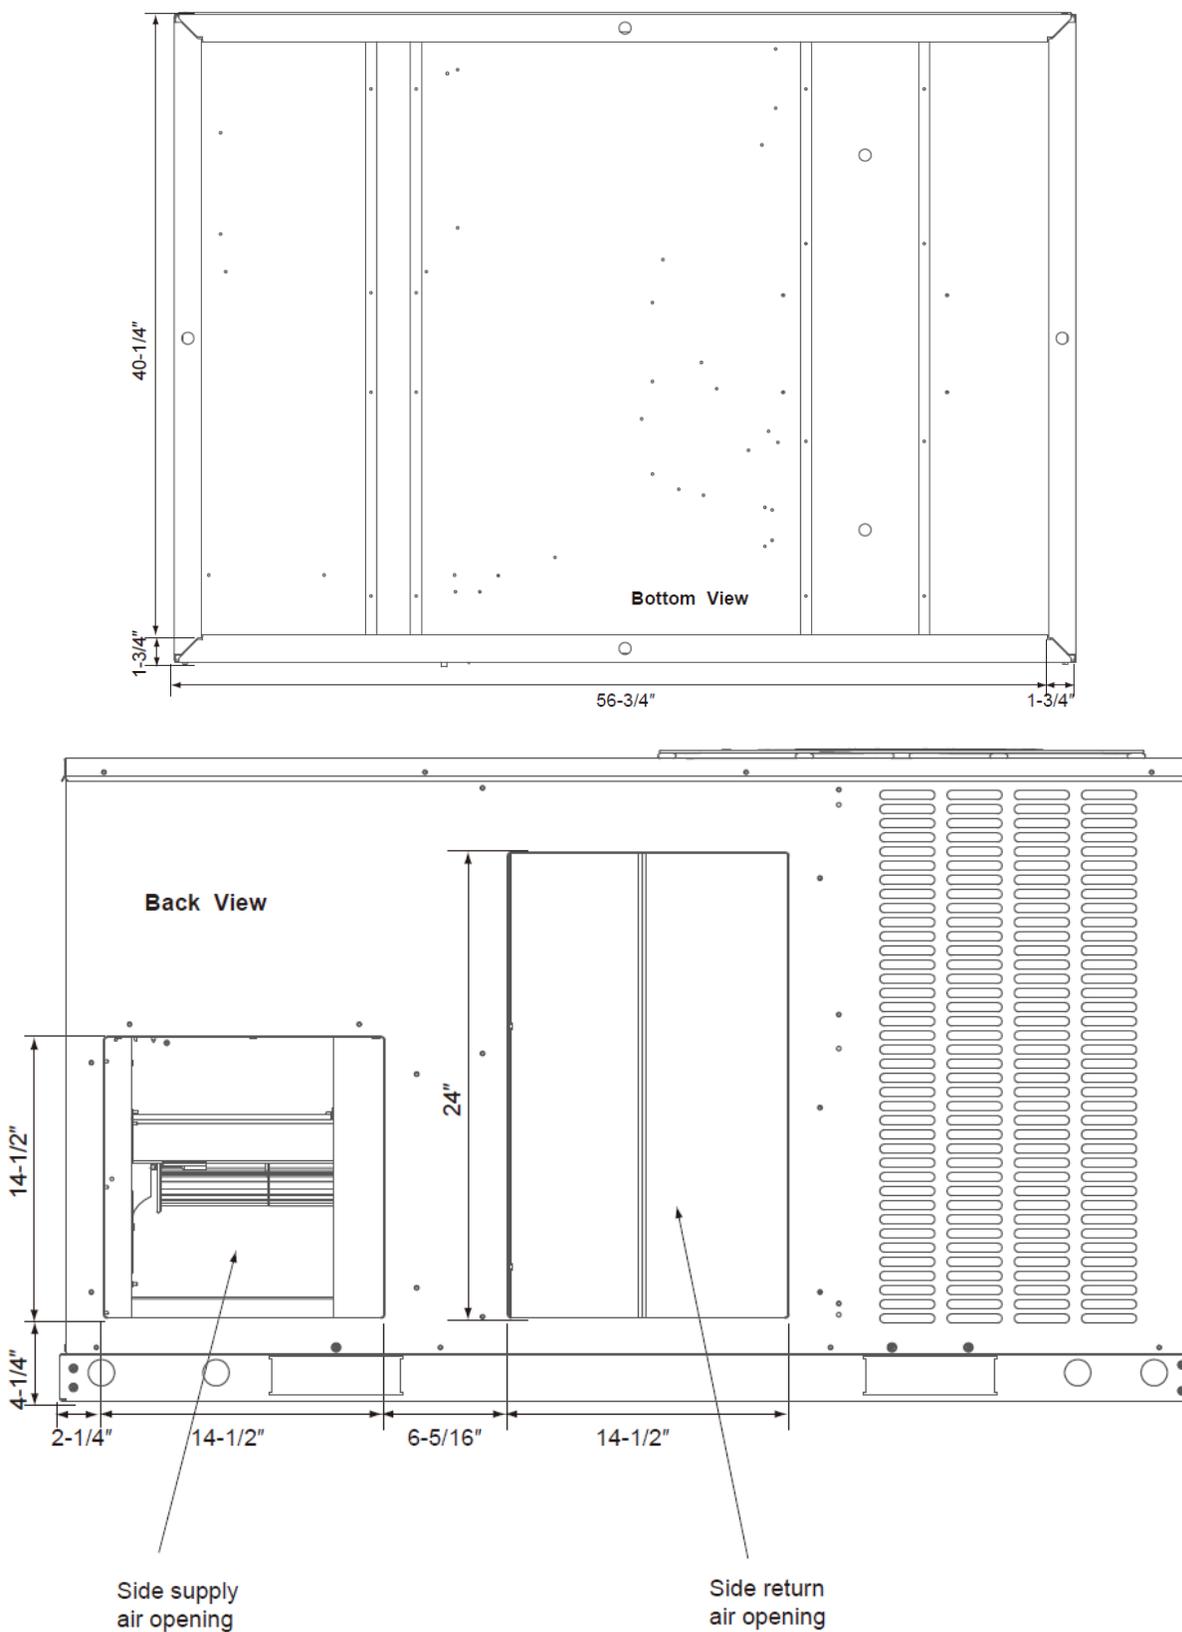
42k, 48k, & 60k Back & Bottom Dimensions
